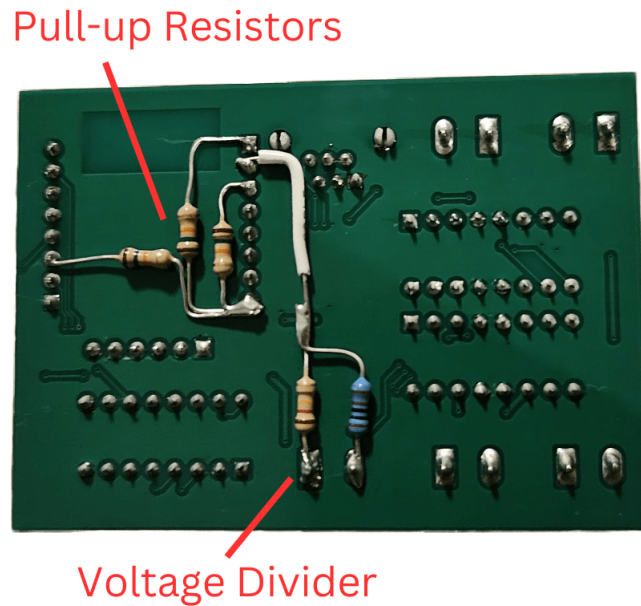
Bottom side of the PCB with implemented corrections to the design
